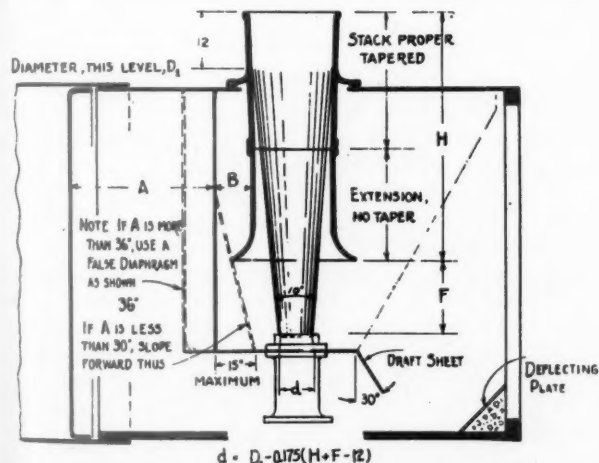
Suggested diaphragm arrangements with Master Mechanics' front end
